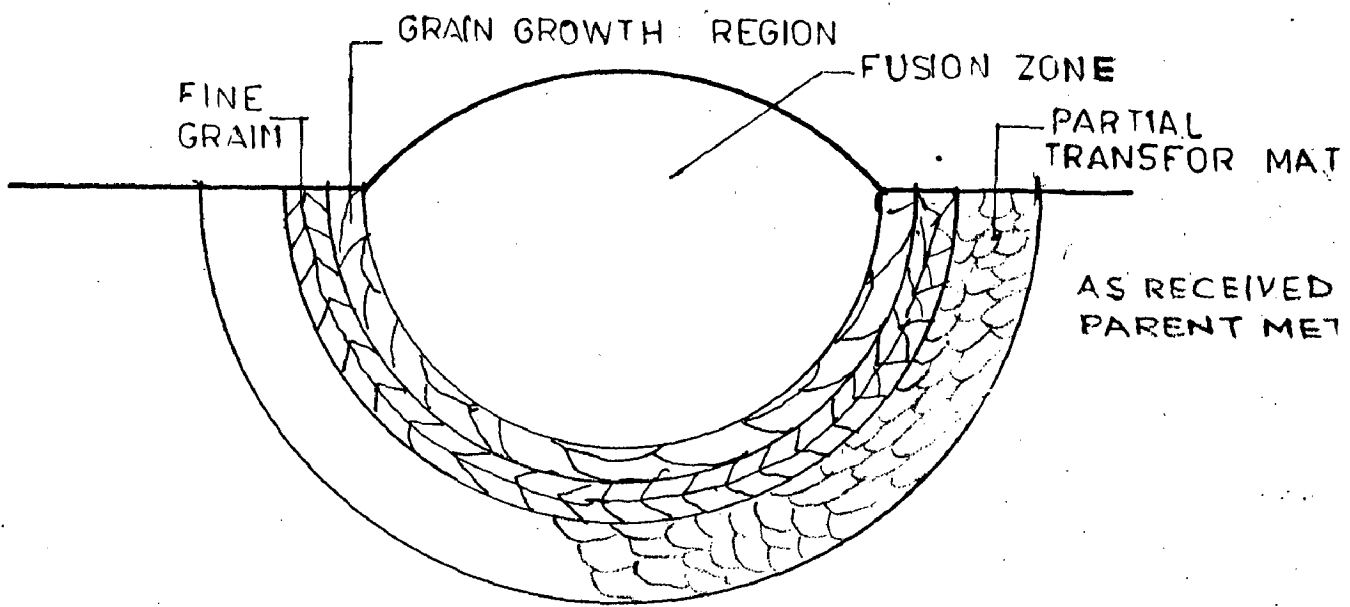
SCHEMATIC MICRO STRUCTURE OF CARBO AND LOW ALLOY STEEL WELDMENT.
